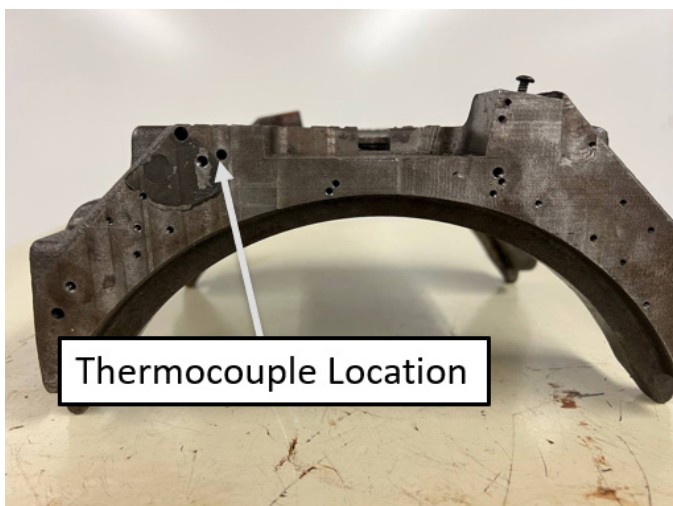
BEARING ADAPTER THERMOCOUPLE LOCATION
